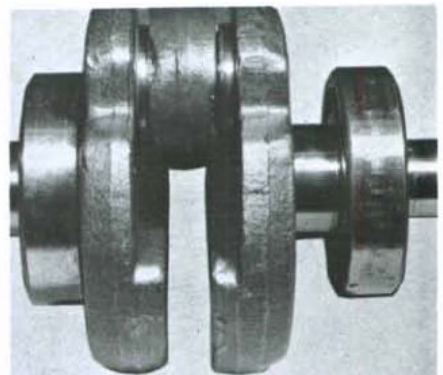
Crankshaft end of "Piston Guided" connecting rod. Refer also to Fig. 18.
